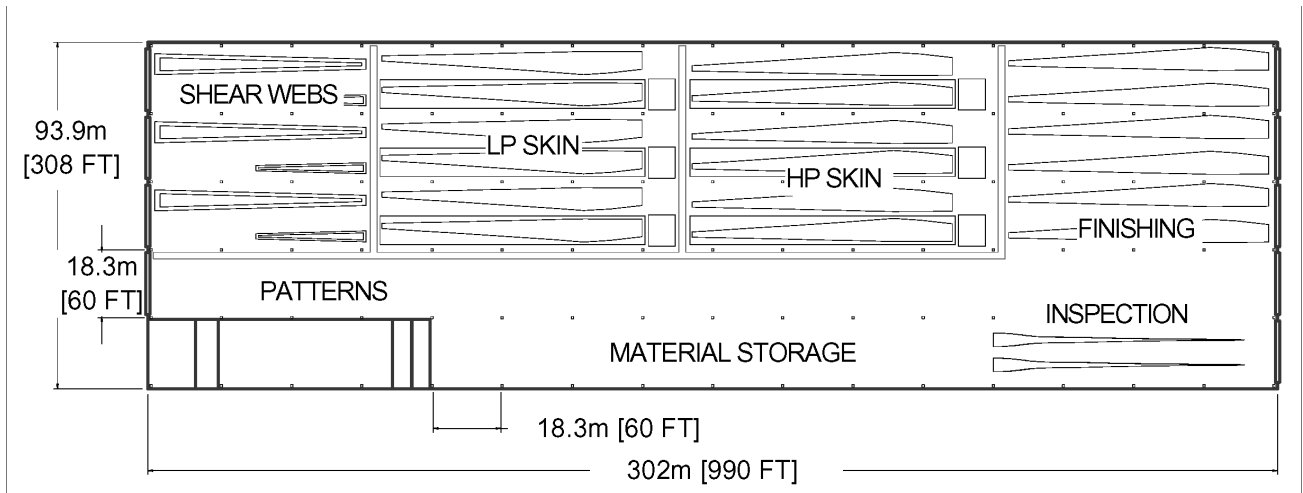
70 Meter Blade Manufacturing Plant Conceptual Layout
